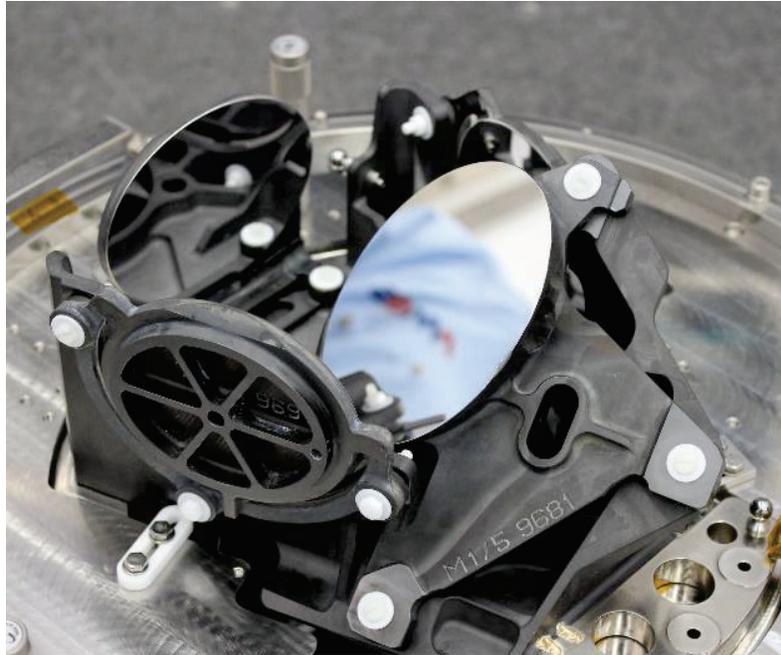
Derotator FM1 assembled and ready to be aligned/tested with the OGSE.
